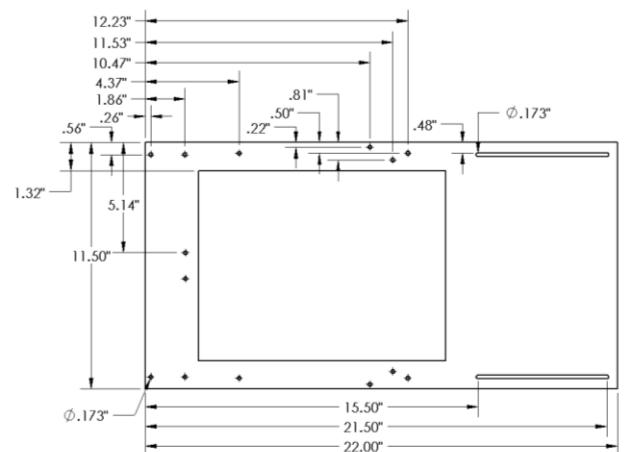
Fully dimensioned frame model, rendered in SolidWorks. Any unspecified dimensions may be found via symmetry. All holes and slots are sized as M4 clearance-fit holes per the University of Florida Tap and Drill Chart [21]. The frame was manufactured via waterjet from this SolidWorks model.
